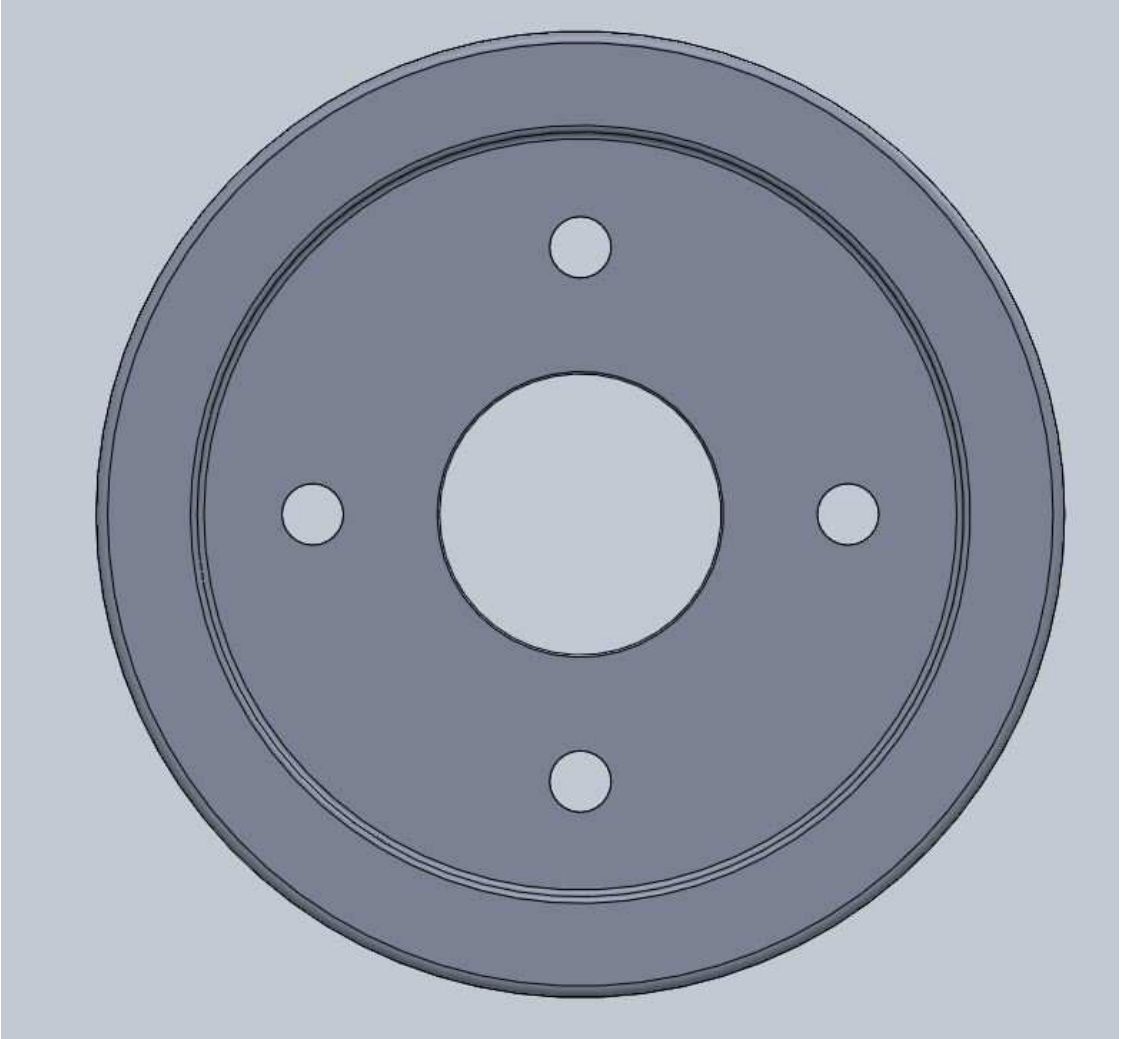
PULLEY CAD BACK VIEW DEAD ON
